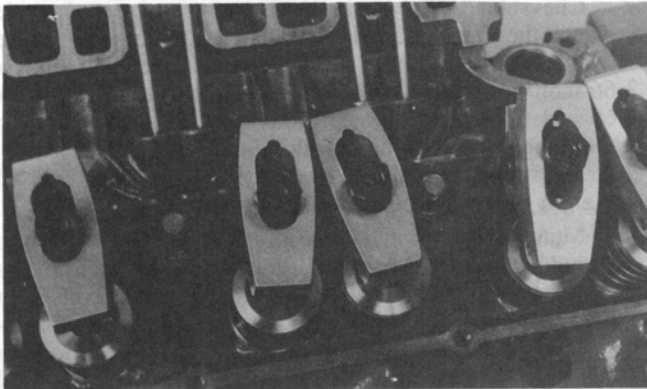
Aftermarket aluminum rocker arms installed on cast iron cylinder head.
